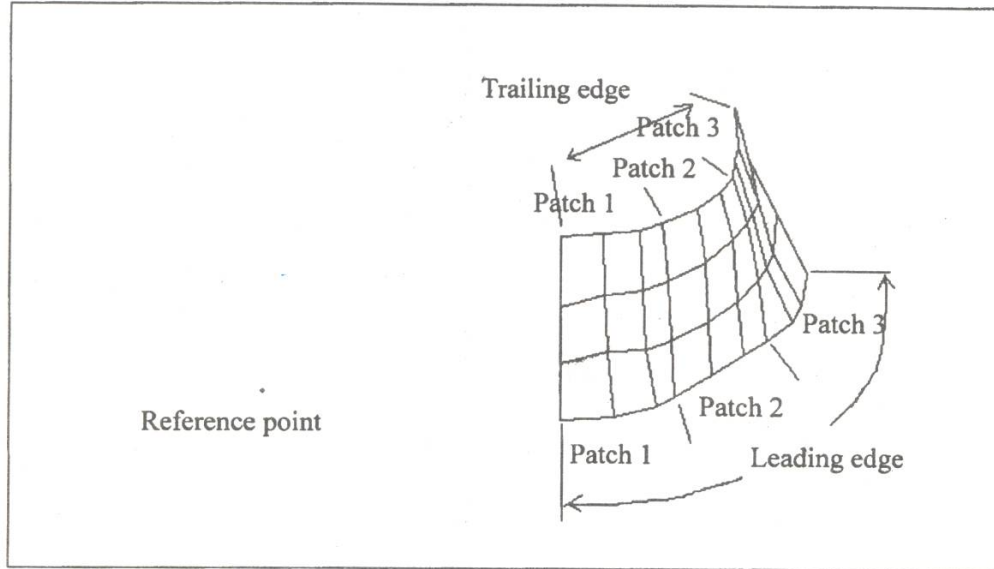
(a) Working surface of the C-type blade developed using GS method
